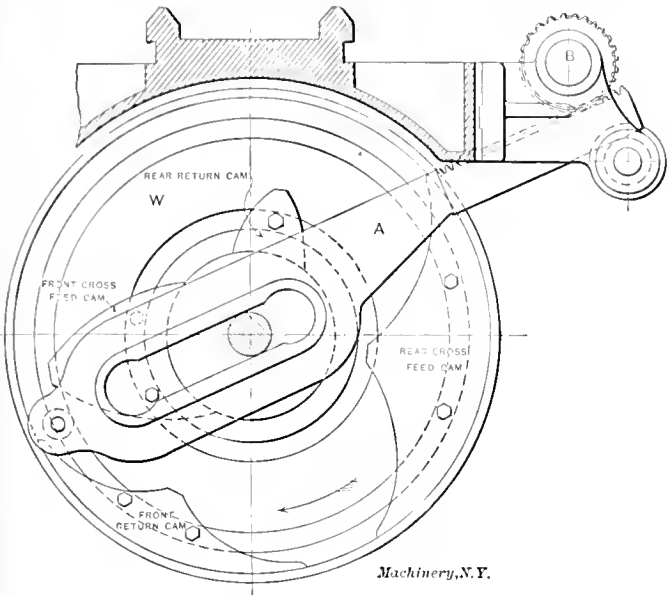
Diagram of Cross-slide Cams and Mechanism.
